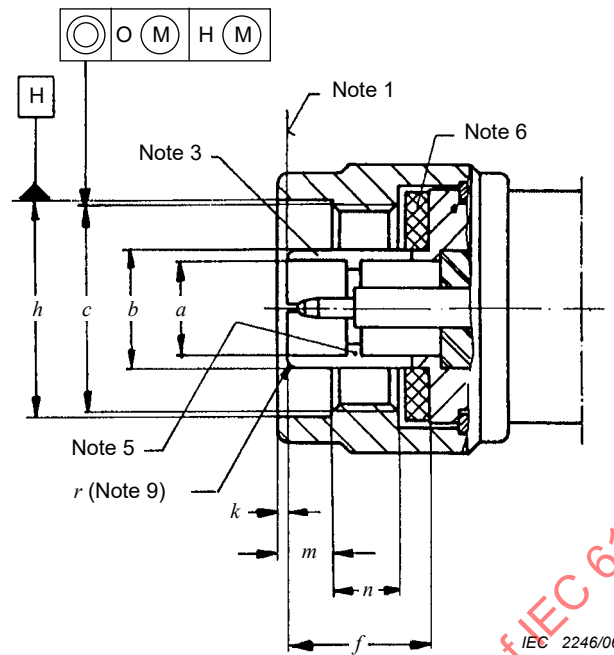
Connector with pin centre contact (for notes and dimensions, see Table 1)
